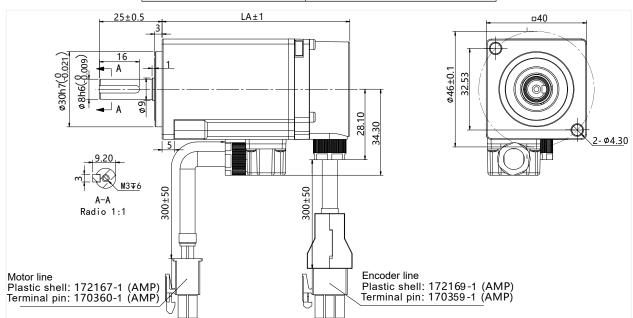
Installation dimension of WD series 40 flange servo motor
